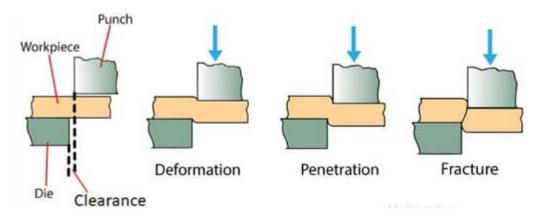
A schematic of the cutting operation in a sheet metal working.
